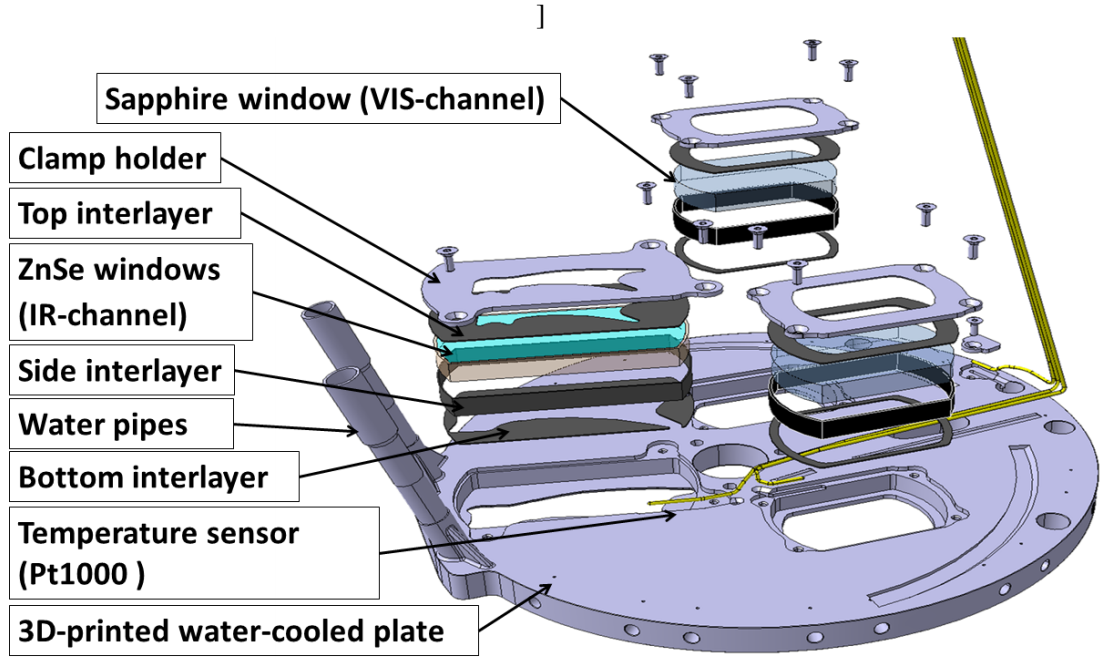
Exploded view window assembly. This view highlights the assembly of protective windows, including interlayers and holders. An integrated temperature sensor (yellow) is also part of the design.
